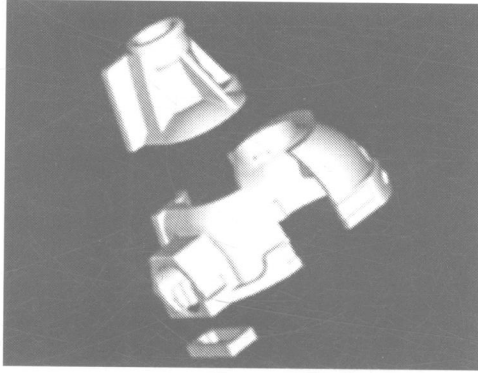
Removal of rectangular section at bottom of housing to facilitate assembly.
